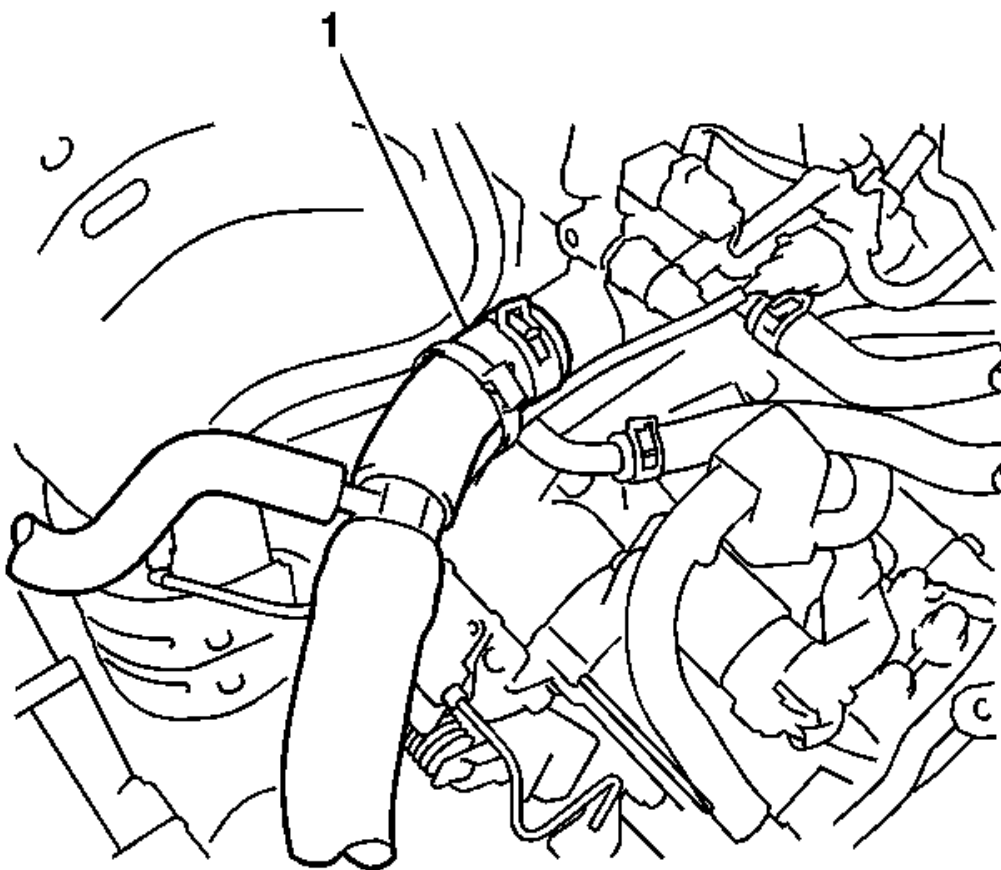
View Of Upper Radiator Hose At Cylinder Head
